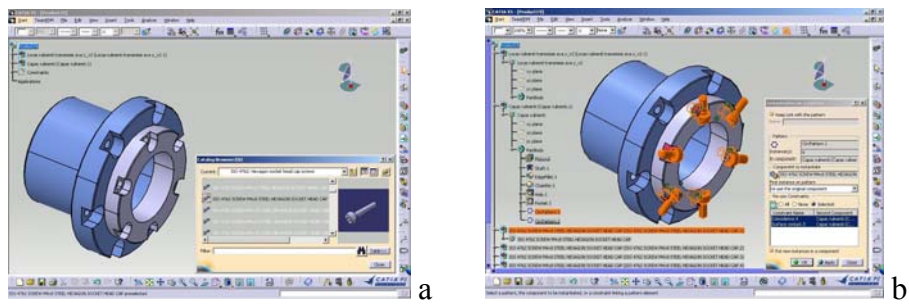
a) Selection of one part using CAD 3D catalogue;
